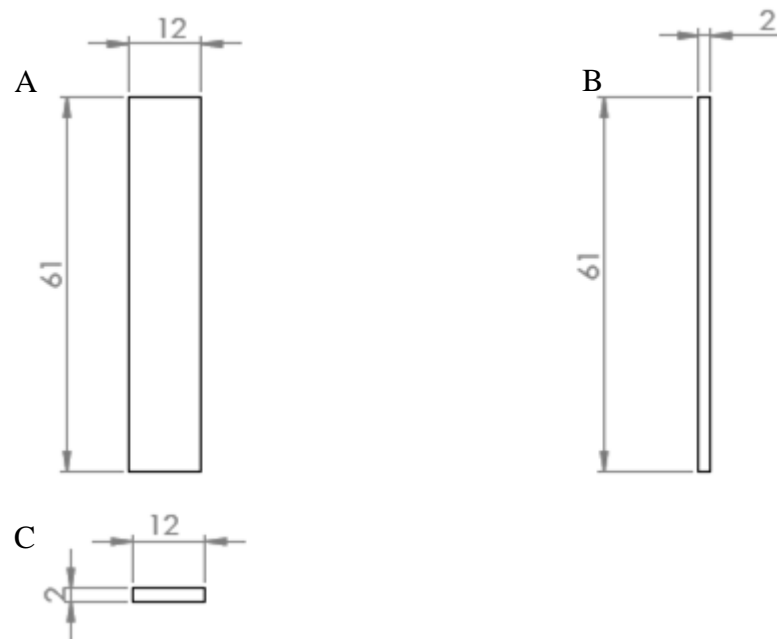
An acrylic fixed moving plunger with piezoelectric actuator drawing in mm scale, (A) front view, (B) side view and (C) top view.
